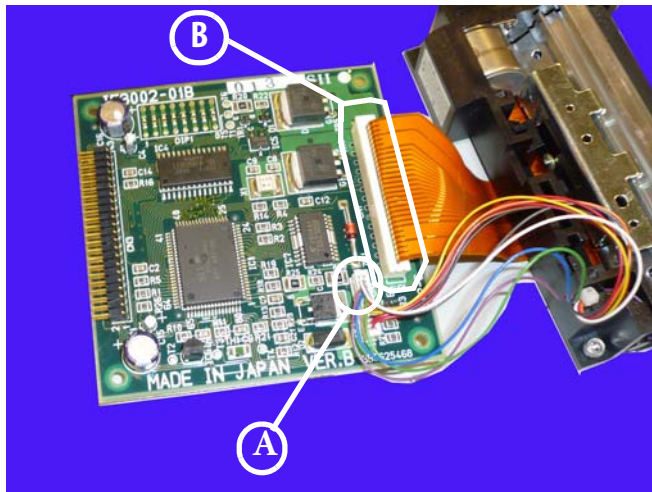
Remove the sensor cable (A) and the flex cable (B) from the printer control board
